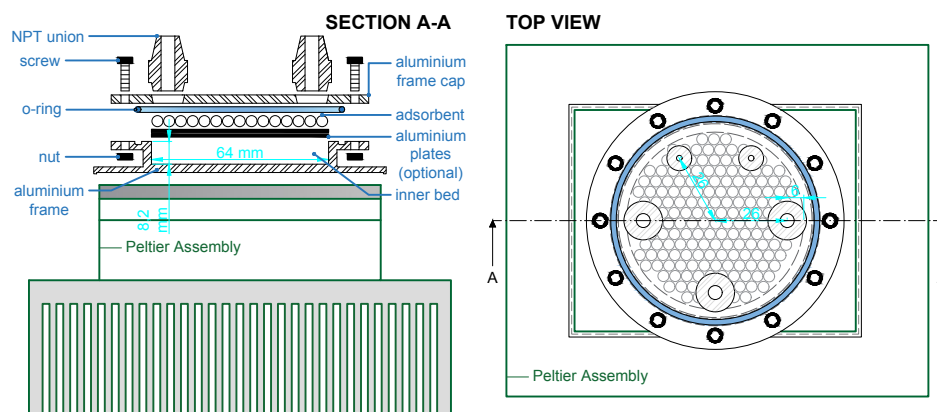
The top view and section A–A view of the circular packed Bed 1 of 64 mm diameter and 8.2 mm height, which is composed by: optional aluminium plates to be placed at the bottom of the bed, adsorbent pellets, aluminium frame cap, plastic o-ring and screws to seal the bed, and NPT unions for the connections of the inlet and outlets of the bed.
